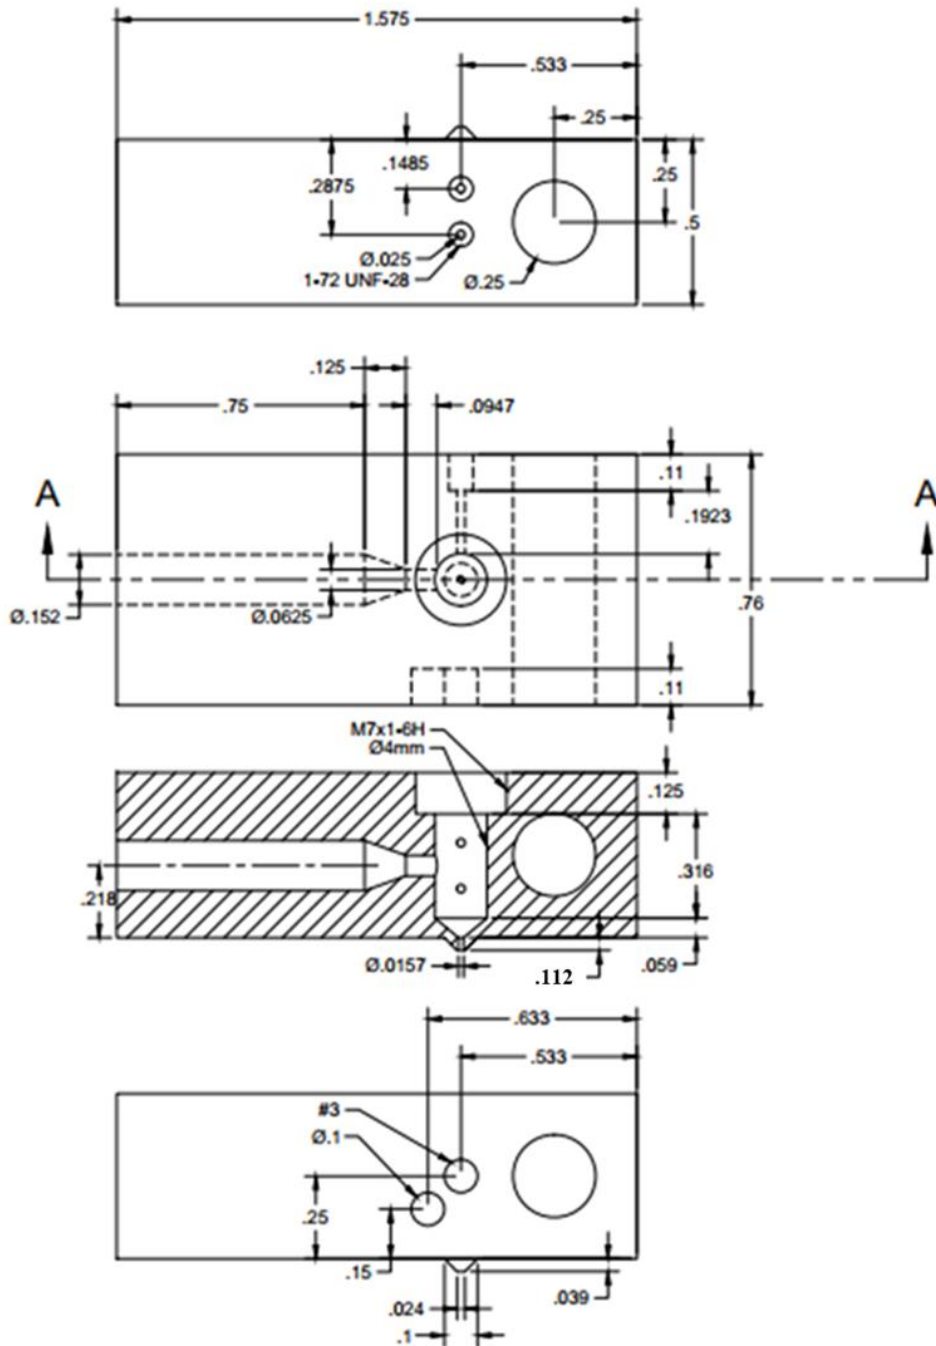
Dimensions of modified nozzles. Dimensions are in in unless otherwise specified.
